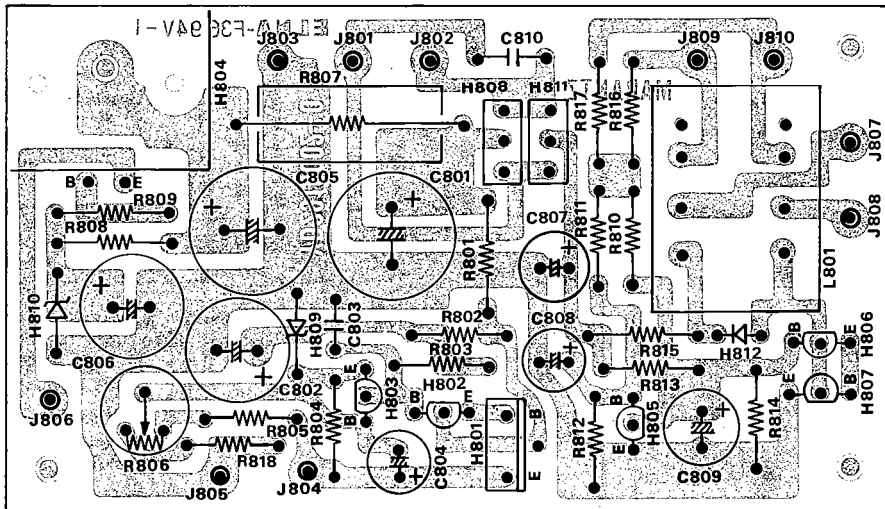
Power Supply and Protection Relay Circuit Assembly P800 Component Locations
